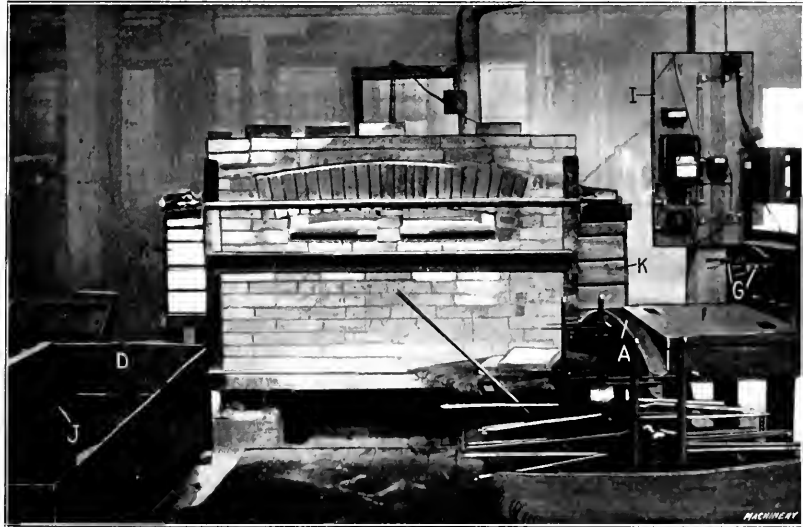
Closer View of the Furnace illustrated in Fig. 1
